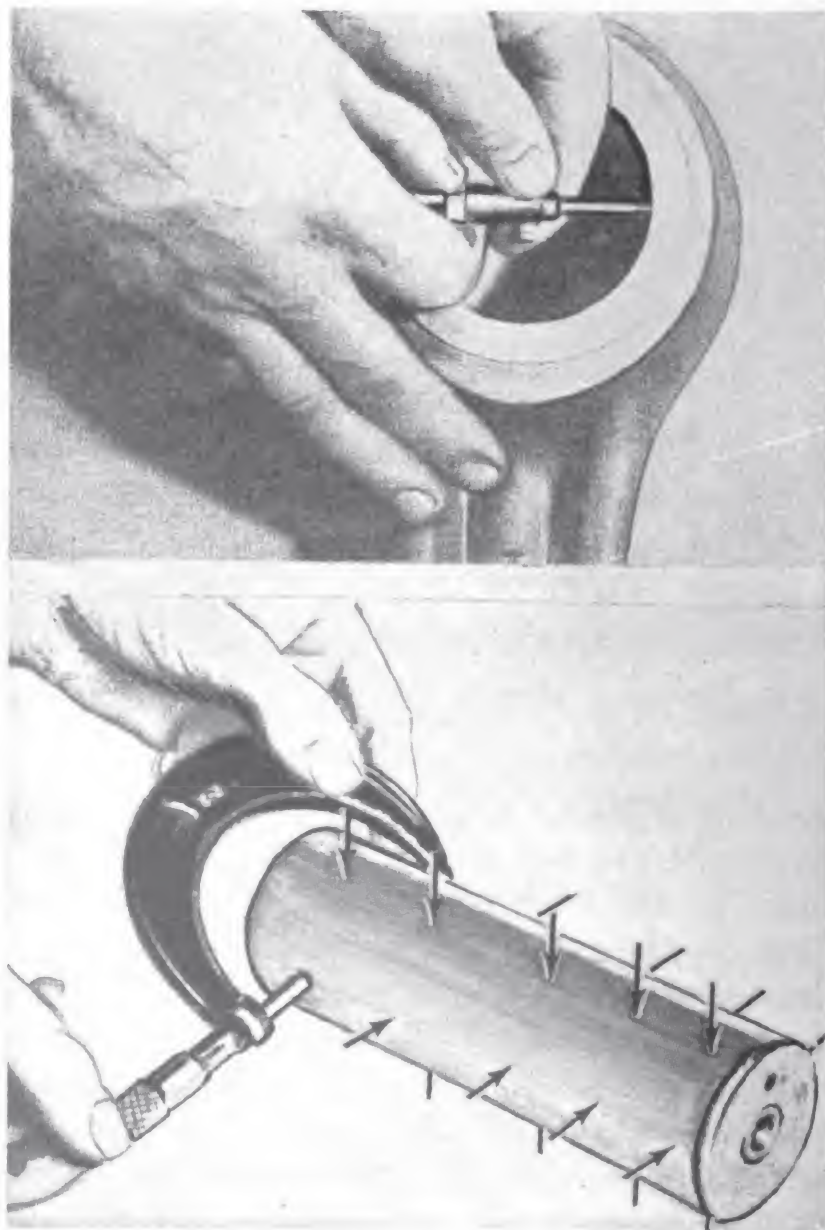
Measuring piston pin and piston bushing for wear.
